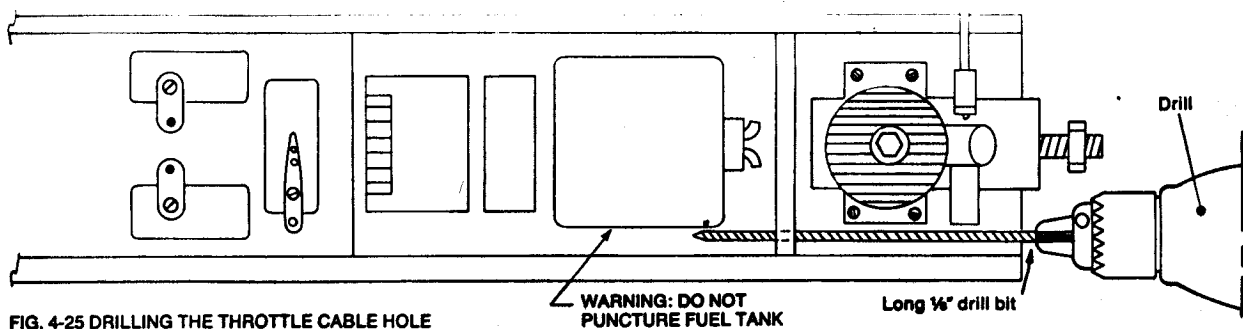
DRILLING THE THROTTLE CABLE HOLE
